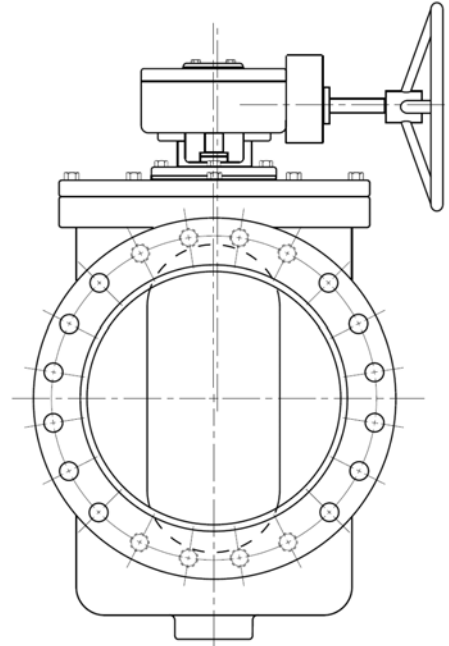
PLUG VALVE WITH GEAR ACTUATOR
